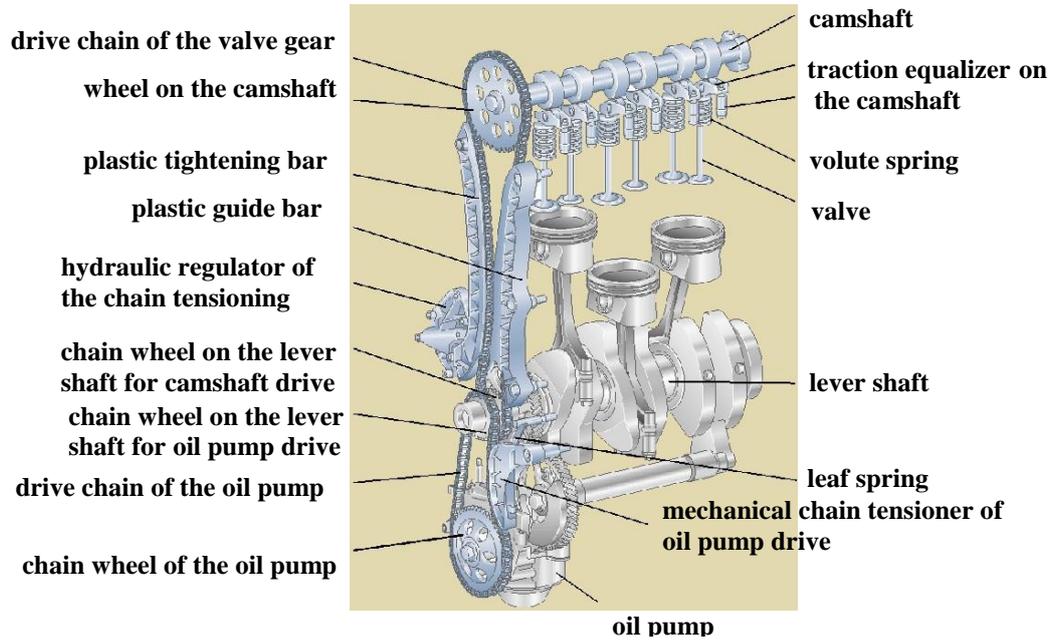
Skoda's cam drive and oil pump drive of the 2-valve engine
